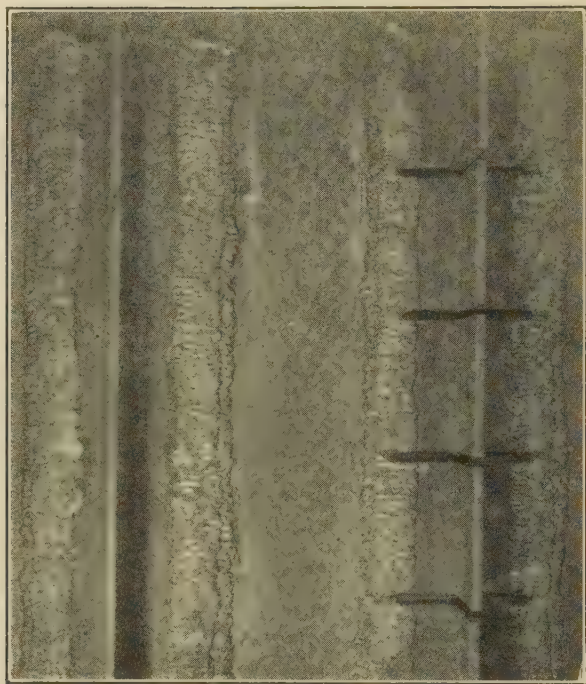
Test No. 1, after completion of welding and before tests to destruction.
